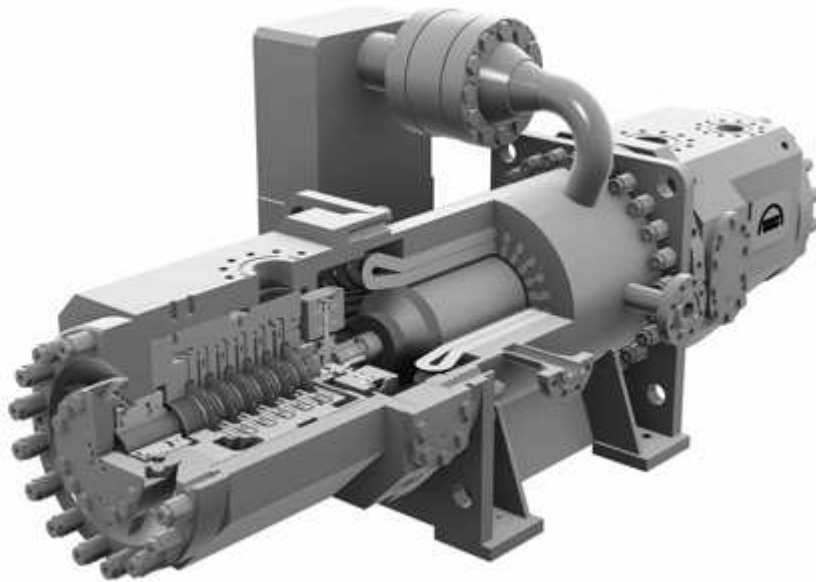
Pipeline compressor HOFIM for natural gas: integration of direct drive and magnetic bearing in the turbomachine, 6 MW, 9000 rpm (courtesy MAN Turbo/S2M).
